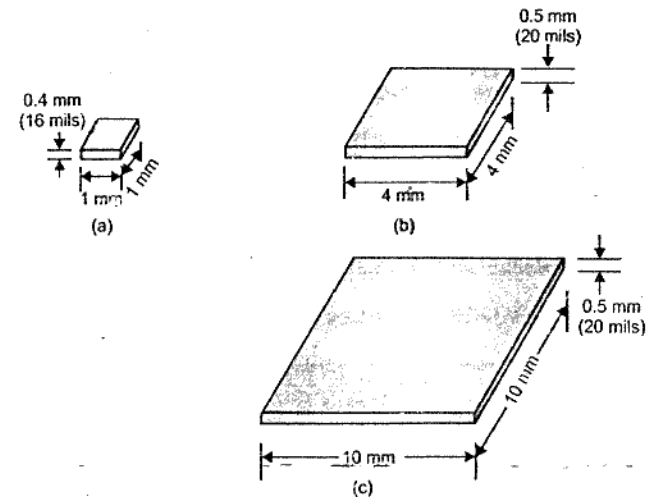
Integrated circuit chips (a) SSI chip (b) MSI chip (c) LSI or VLSI chip
